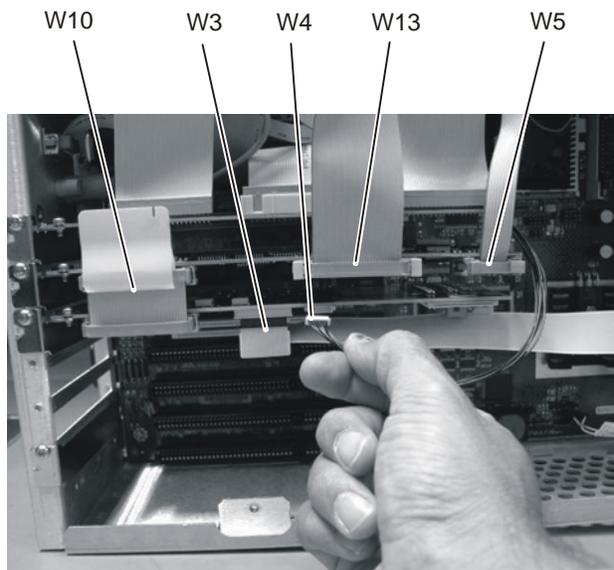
W3, W4, W5, W10, and W13 Cables
